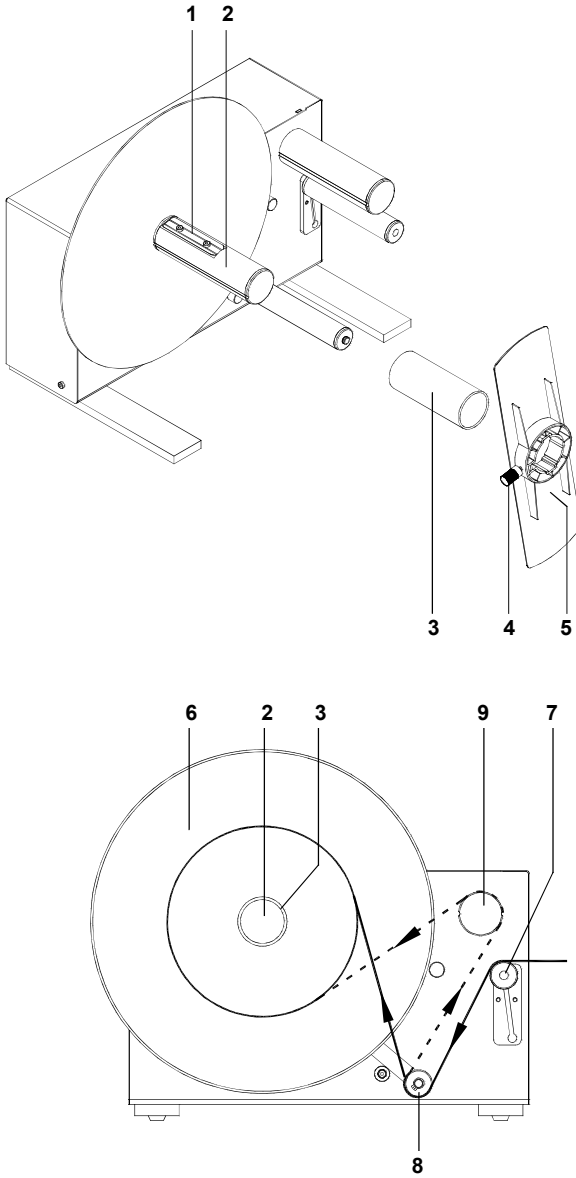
Rewinding onto 1.6 in. (40 mm) Cardboard Core
